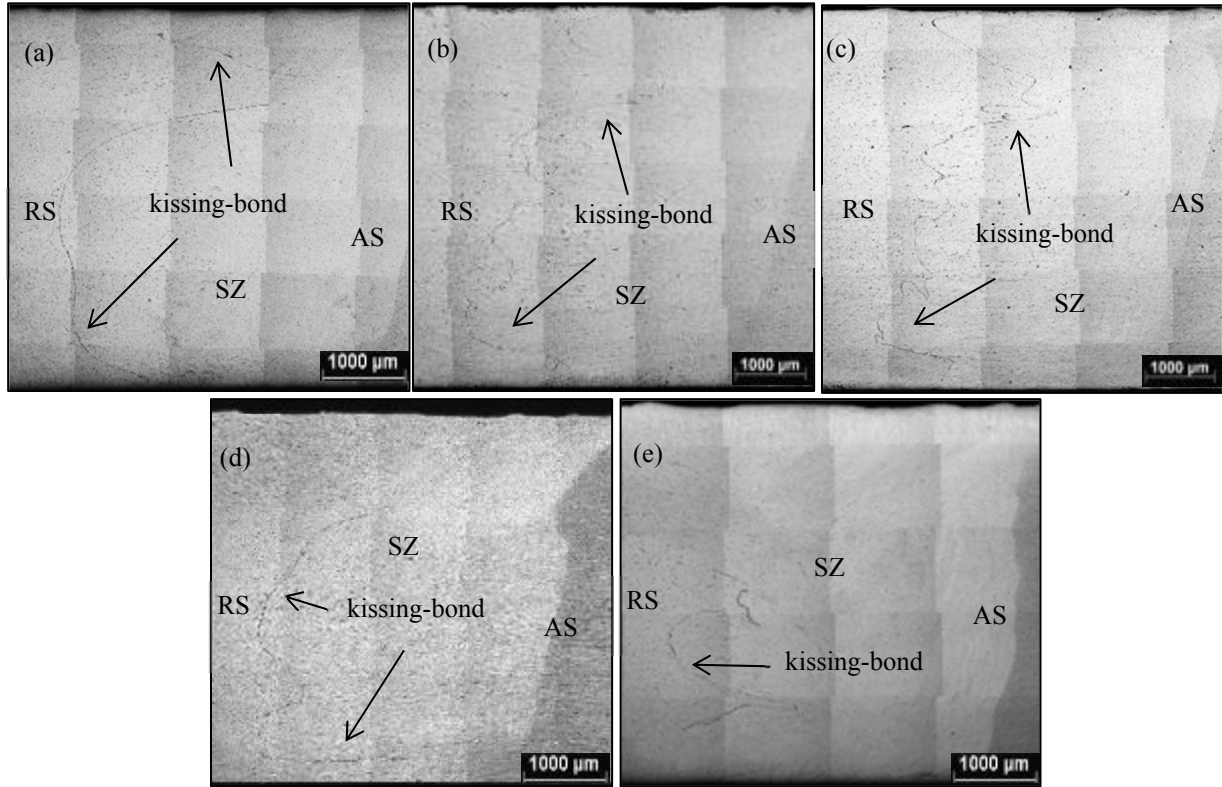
15 Macrostructure profiles of the AA5083 FSW welds at different welding parameters.
